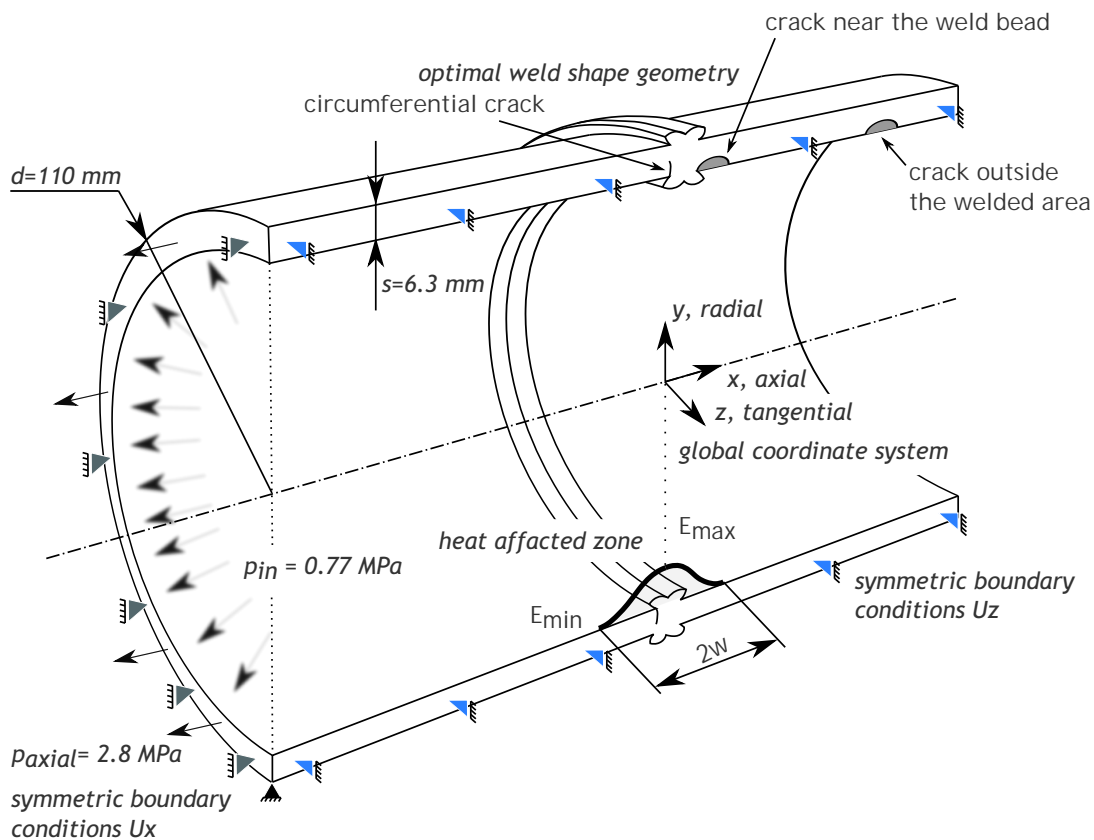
Geometry of butt welded pipes with different crack defects
